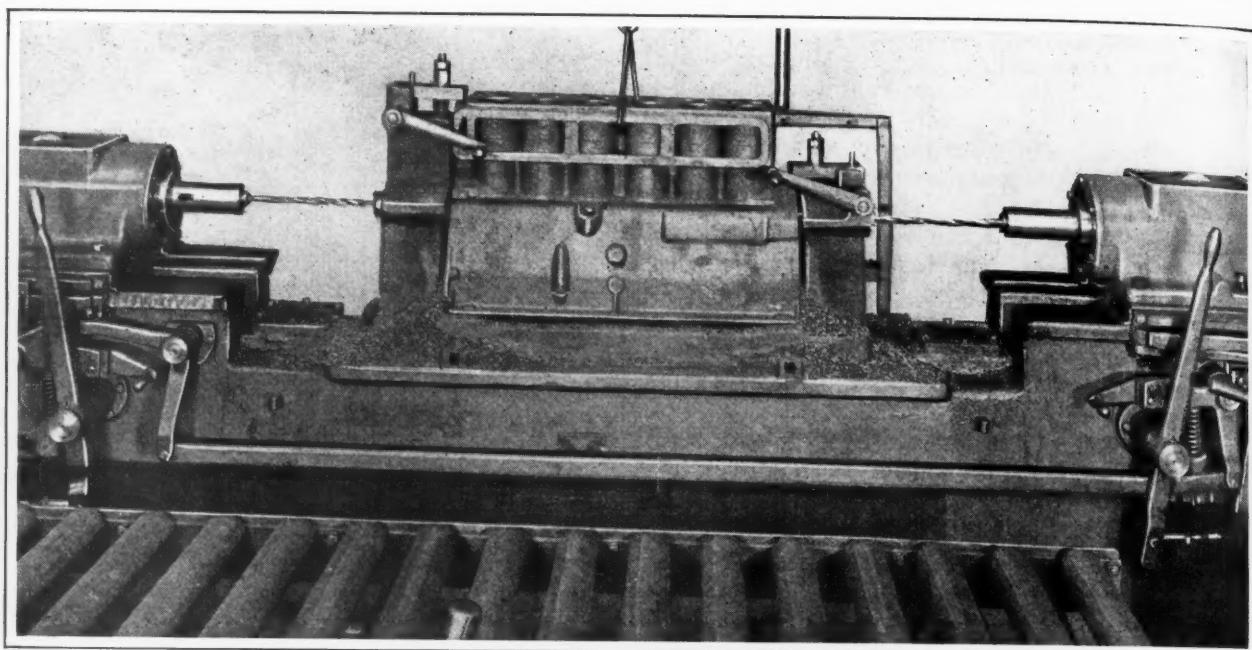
Use of Long Drills for Producing a Small Hole Thirty Inches Long
